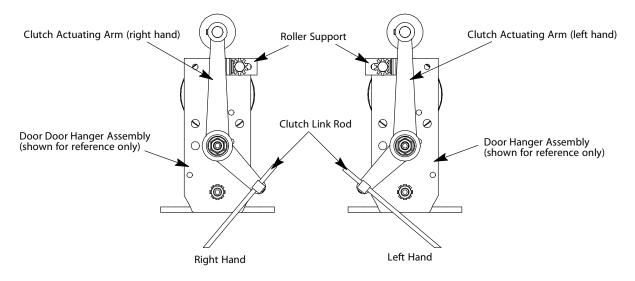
Clutch Arm and Roller Support to Door Hanger
